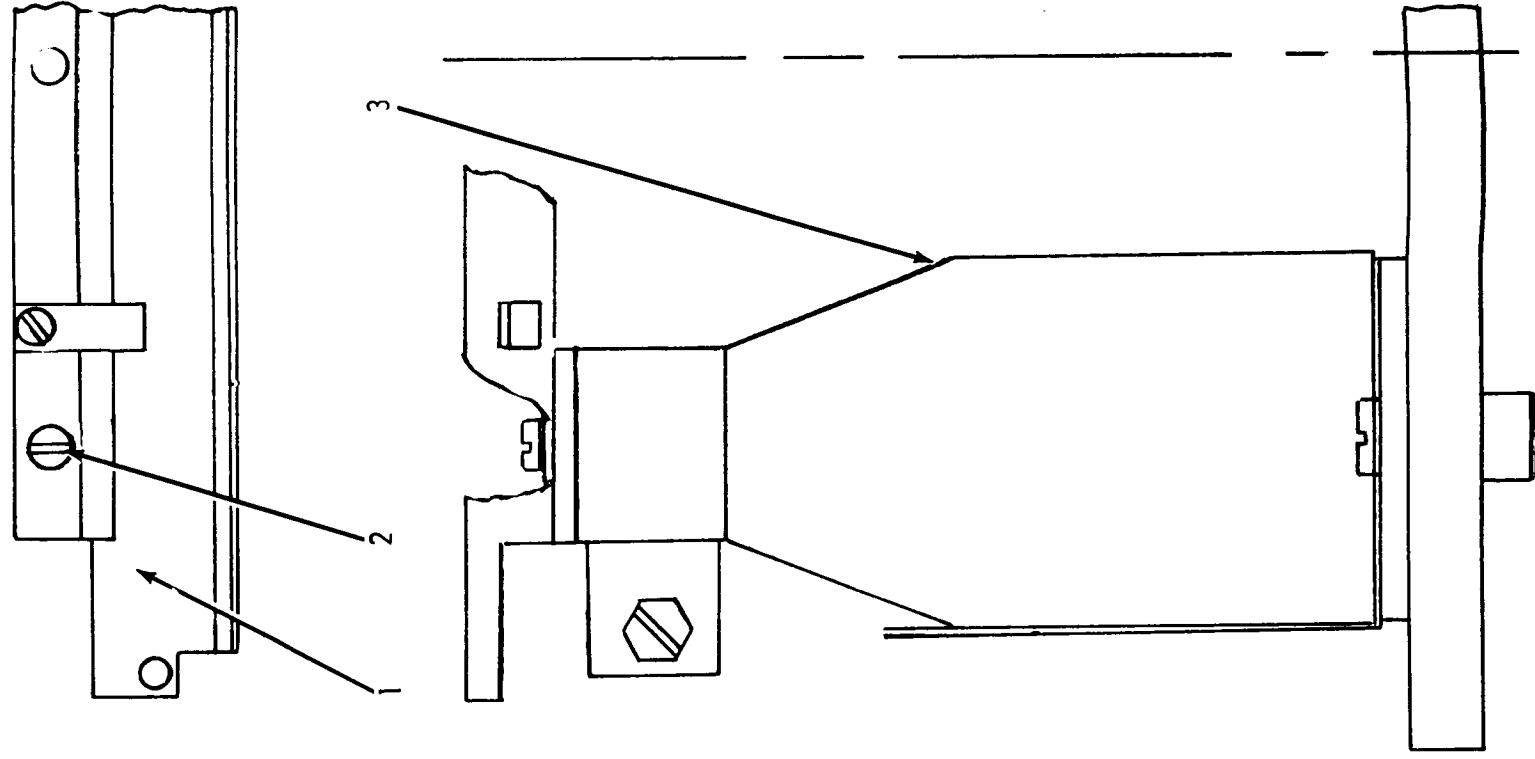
TRANSFER CHASSIS ASSEMBLY
